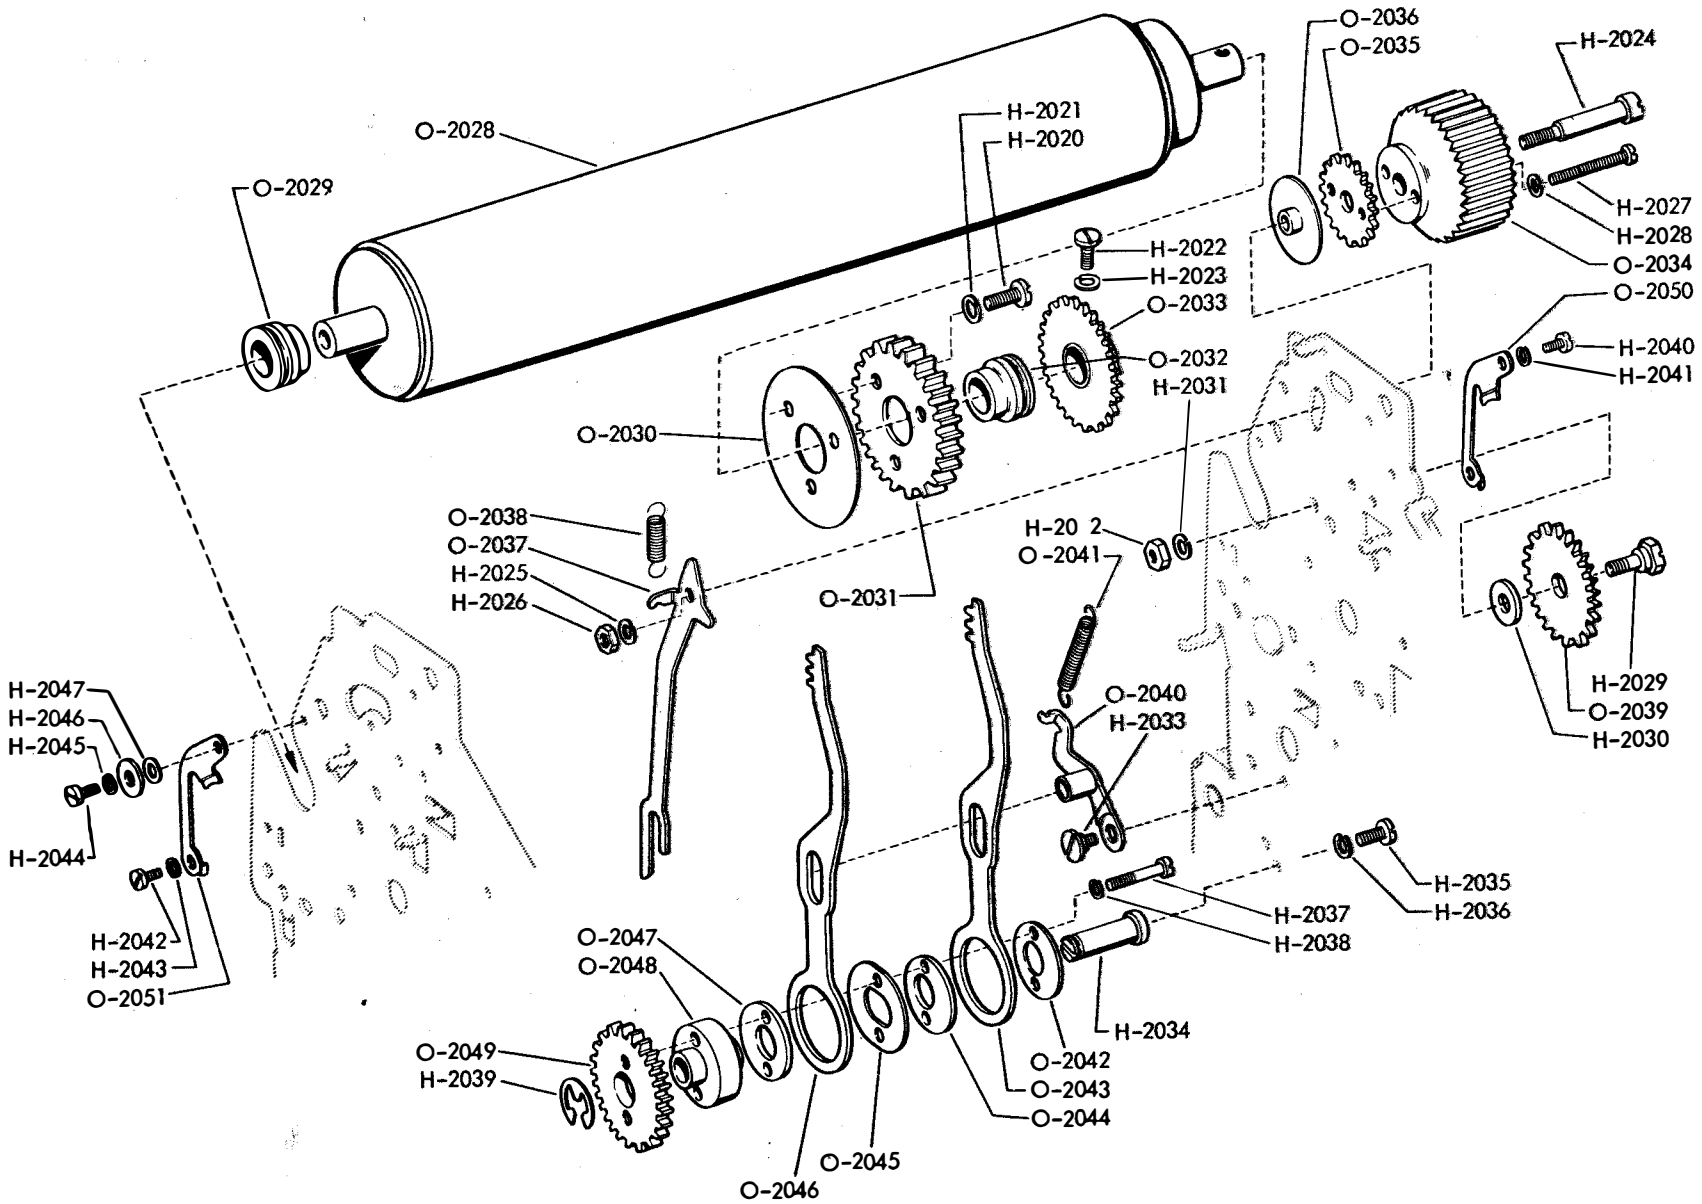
Automatic Typewriter, Line Feed and Platen Mechanism
